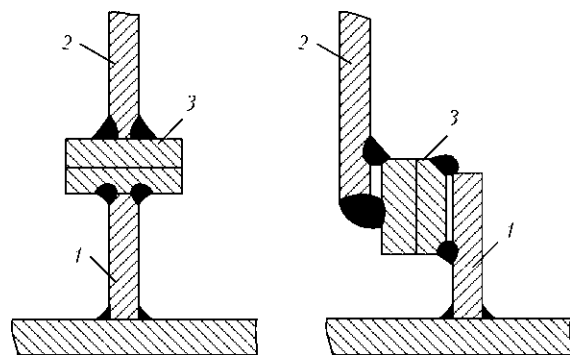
Variants of typical units in welded structures using transition pieces of dissimilar materials [2]: 1 – steel structure element; 2 – aluminium element; 3 – bimetallic aluminium alloy–steel transition piece
